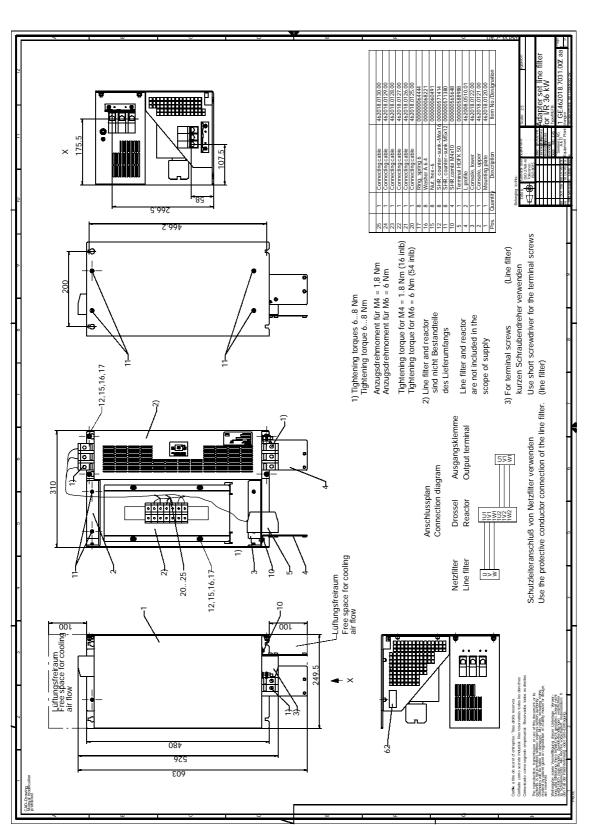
Adapter set, line filter for I/R module 36 kW, 6SN1162-0GA00-0CAx; dimension drawing
